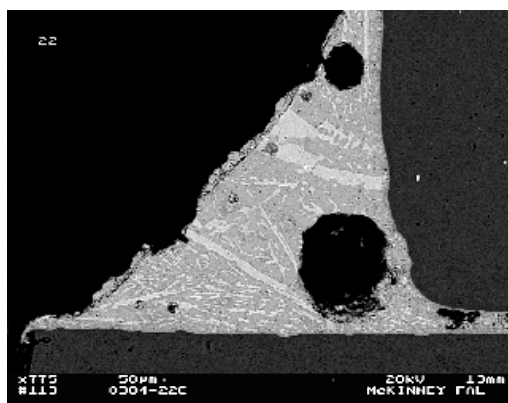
Close Up Image (775X) of Left Solder Fillet in Figure 8.
